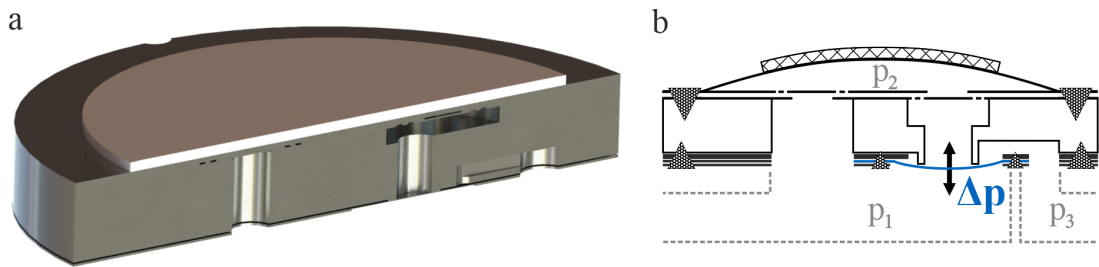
Design of a micropump with an integrated passive safety valve. This concept includes laser welding of metal foils to both sides of the rigid base. a CAD model of a piezomounted steel micropump with added safety valve functionality in the bottom foil stack. b Schematics of the structural design of the micropump with integrated freeflow protection. The safety valve foil fulfills its desired function depending on the pressure gradient.
